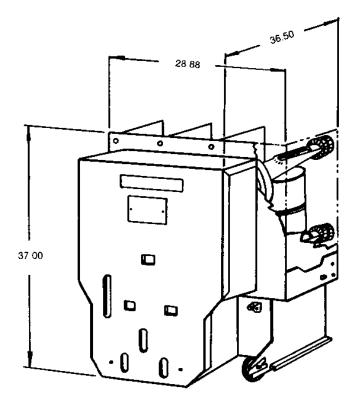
Vacuum Metal-Clad Circuit Breaker (Weight 550 lbs.)
